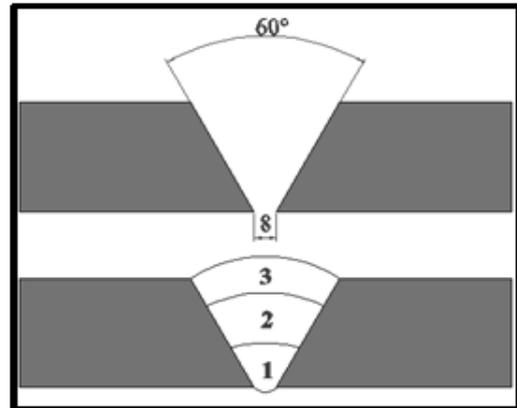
Scheme of joint preparation of FCAW weld, V shaped groove design and number of welding passes
